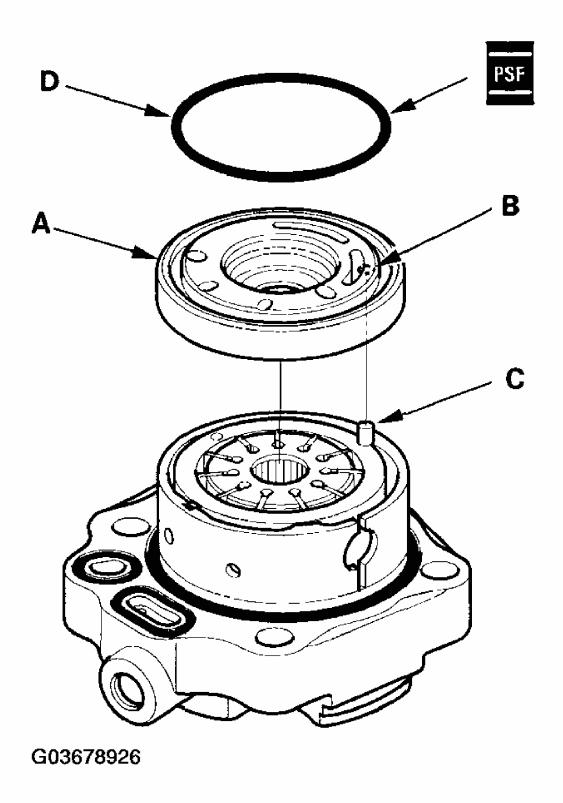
Aligning Roll Pin Set Hole With Roll Pin Courtesy of AMERICAN HONDA MOTOR CO., INC.
